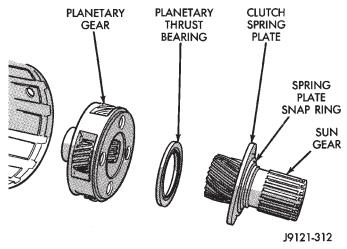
Removing Sun Gear/Thrust Bearing/ Planetary Gear
